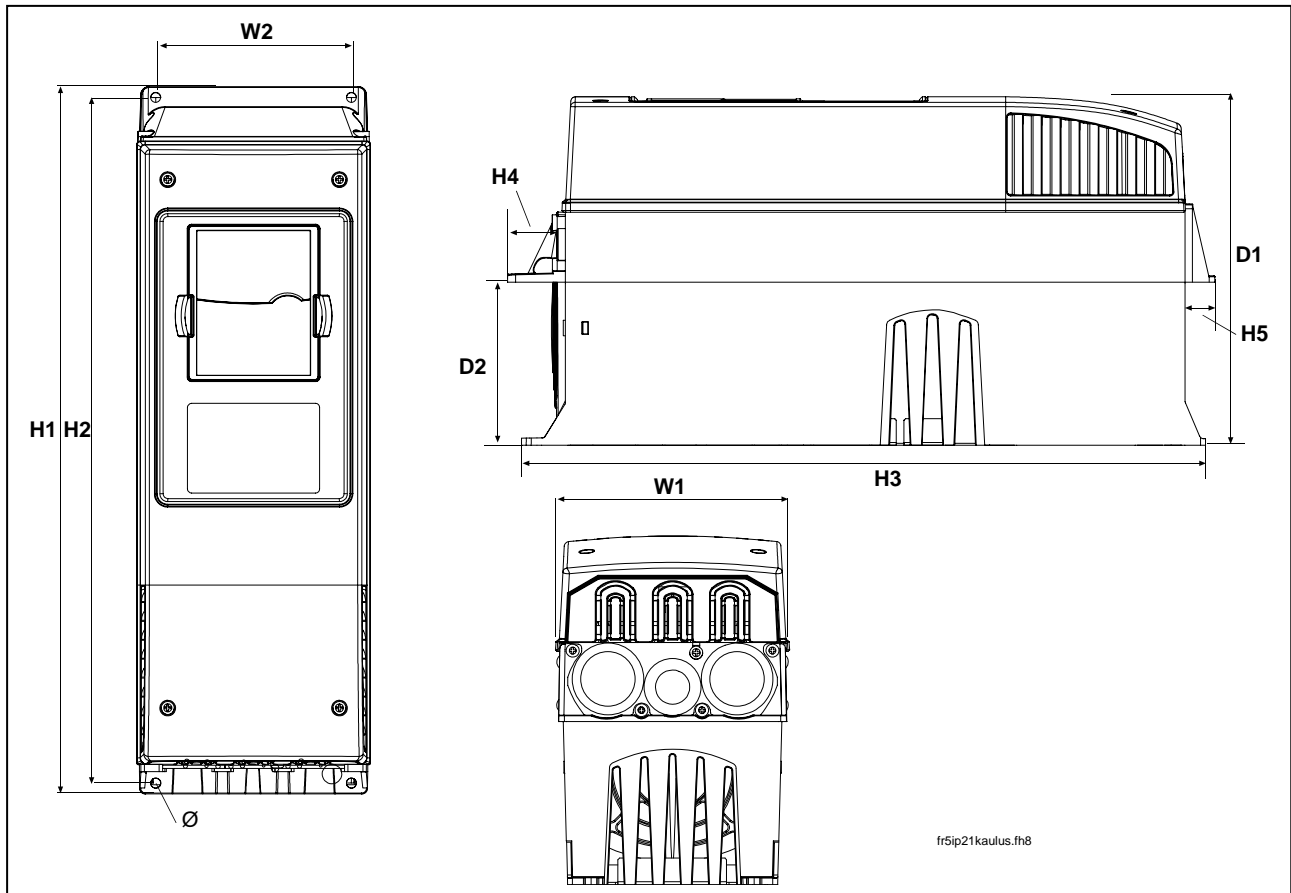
ACCel500 Inverter Dimensions, IP21 with Flange, FR4 and FR6
